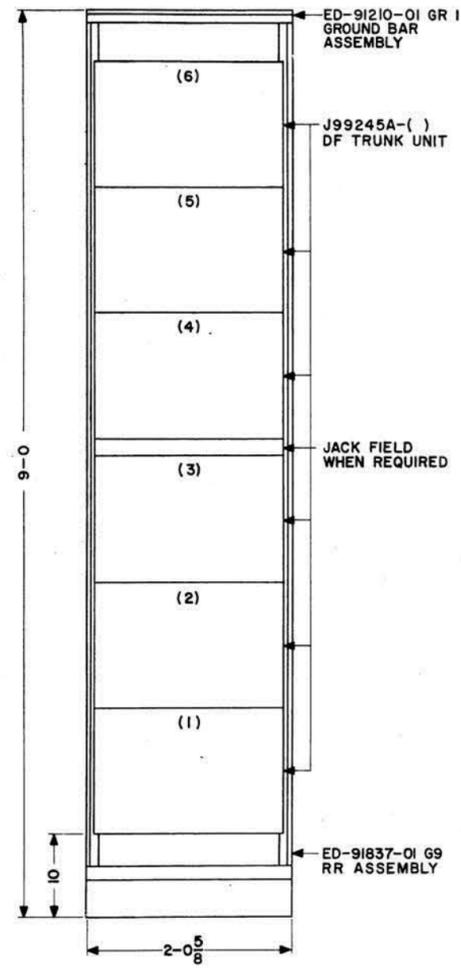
ED-92934-01 TYPICAL BAY EQUIPMENT ARRANGEMENT OF DF TRUNK UNITS AT RADIO SITE
